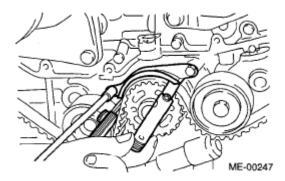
Tightening Timing Belt Guide Mounting Bolts Courtesy of SUBARU OF AMERICA, INC.
